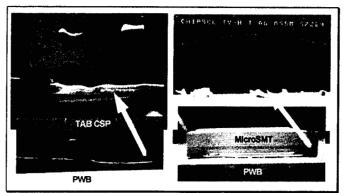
Good Solder Joint Quality of a Grid CSP and Poor Solder Joint Quality of Low I/O Wafer Level
